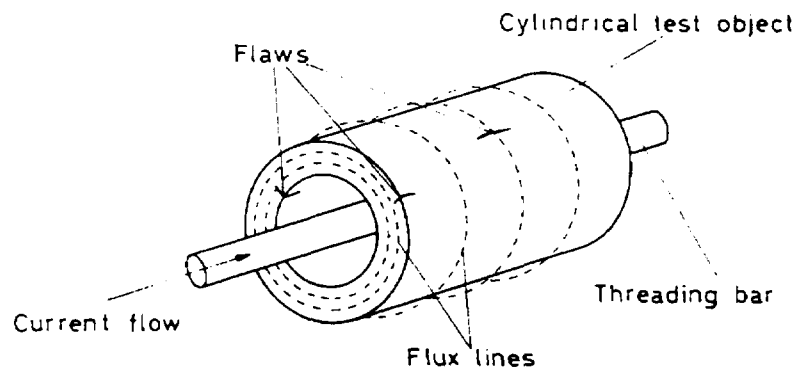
Flux flow in cylindrical specimens using threading bar.
